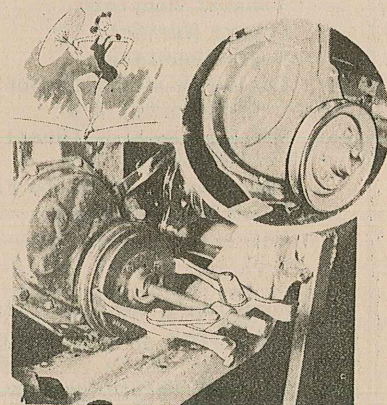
The wrong puller being used on the Harmonic Balancer. Don't do it this way! Inset shows fan pulley before Balancer was installed.
